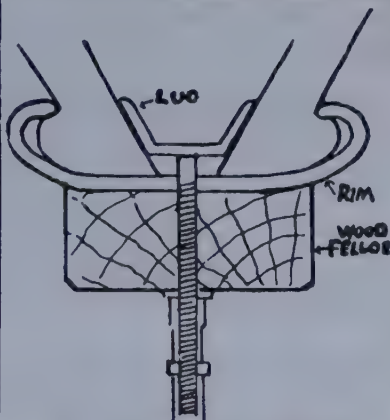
Sectional View Showing How the Tire is Held on the Clincher Rim by a Lug, the bolt of the lug passing through the felloe of the wheel.
